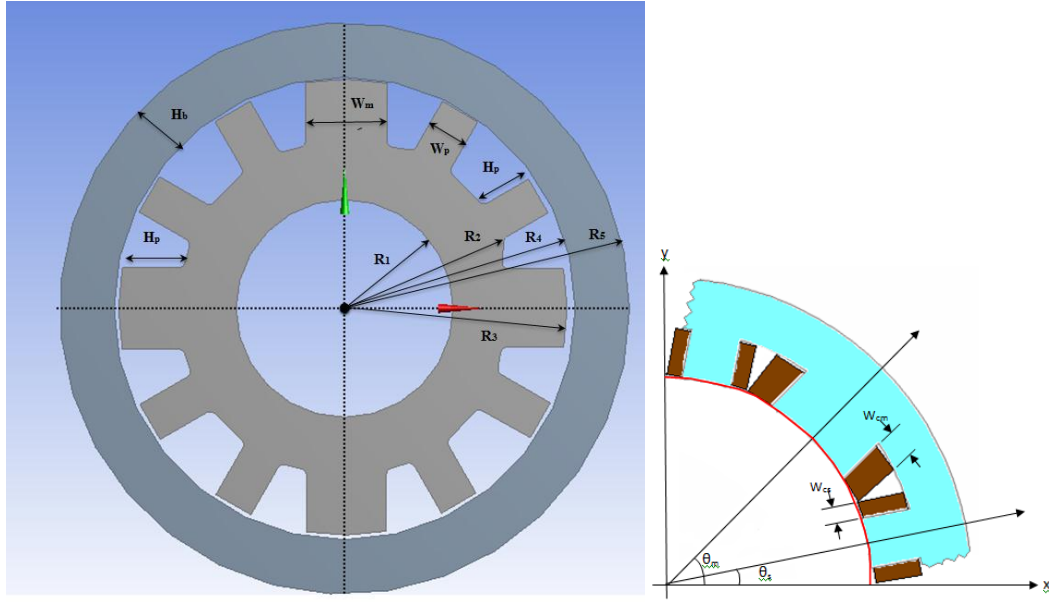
(a) Inside out E-core magnetic bearing (b) E-core magnetic bearing showing coil widths
